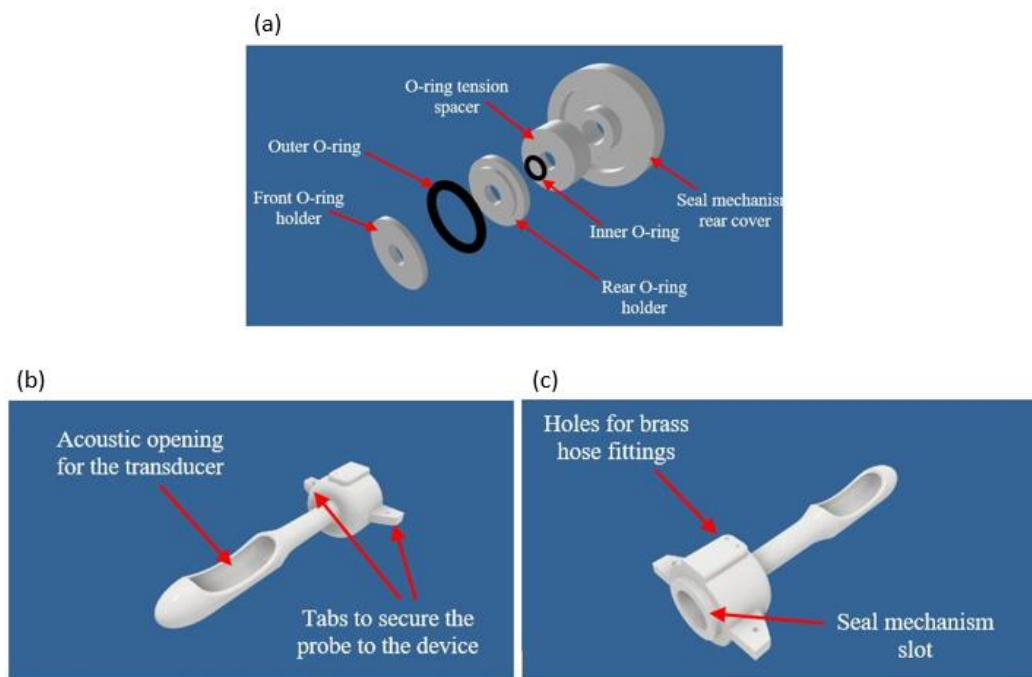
a) Seal mechanism exploded view, Transducer probe b) front view, and c) rear view.
